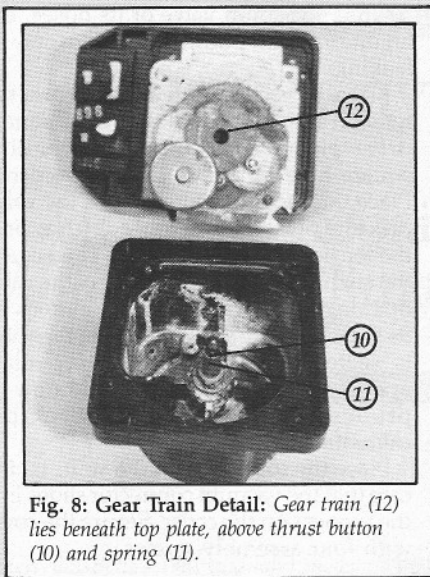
Gear Train Detail: Gear train (12) lies beneath top plate, above thrust button (10) and spring (11).
